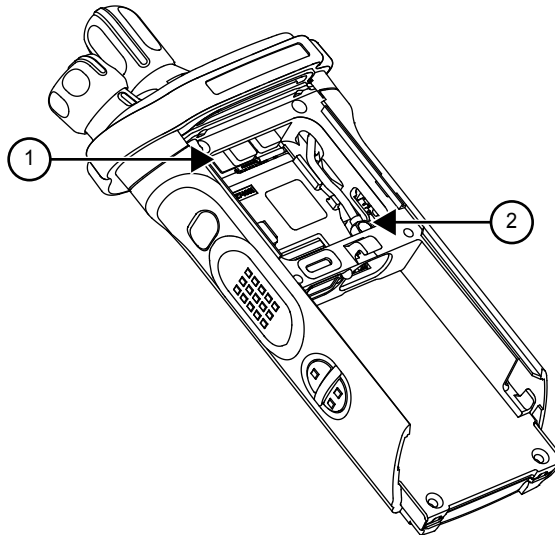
Assembling the Expansion Board Assembly - APX 8000XE
